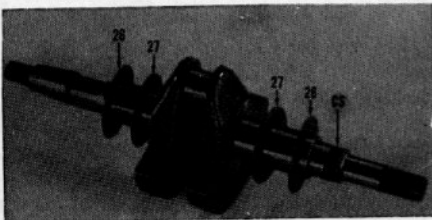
Be sure the steel thrust washers (26) are to outside of thrust bearings (27) when installing crankshaft on Model XL-12. Other models do not use thrust washers or thrust bearings.
